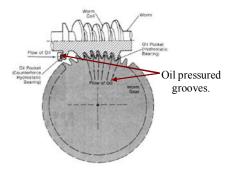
Worn gear reducer with a hydrostatic lubrication.
